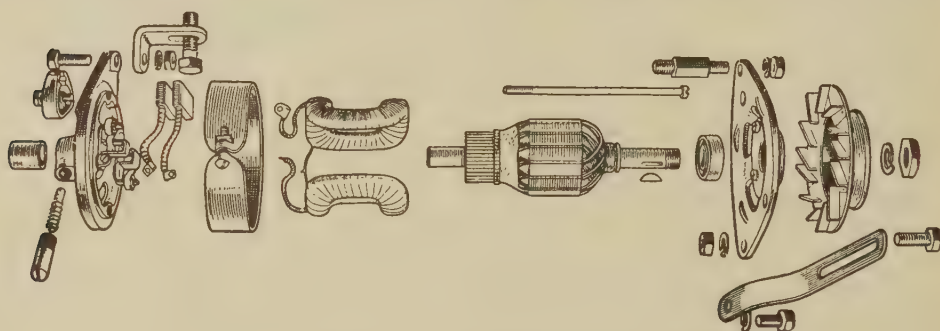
Exploded View of Ventilated Dynamo (Vauxhall).
